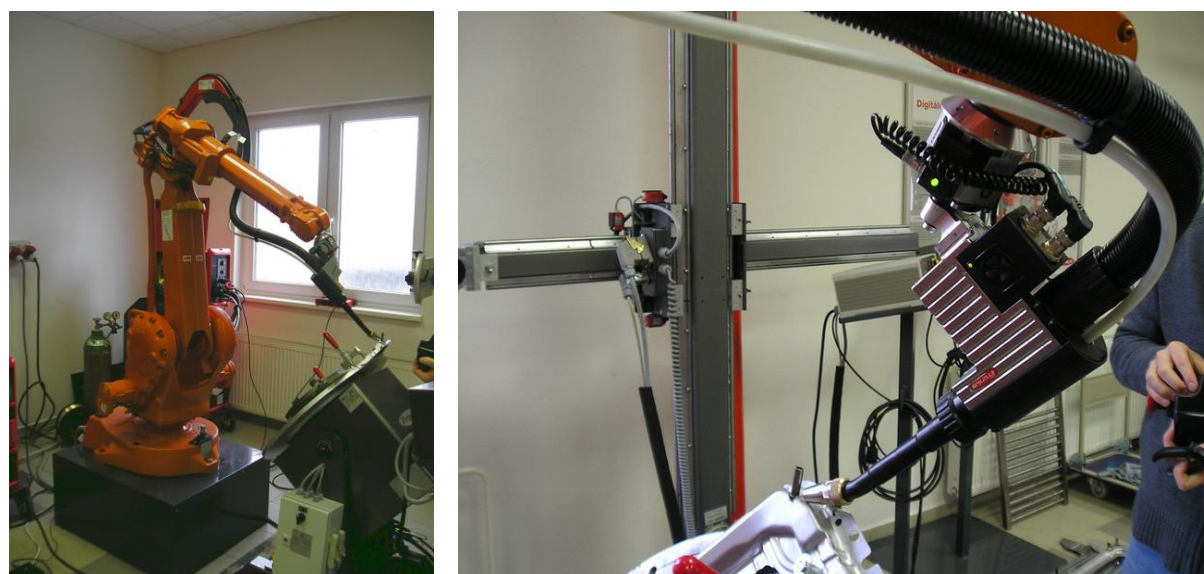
Left – a view of robotized workplace, right – the close-up of Robacta Drive CMT welding torch
